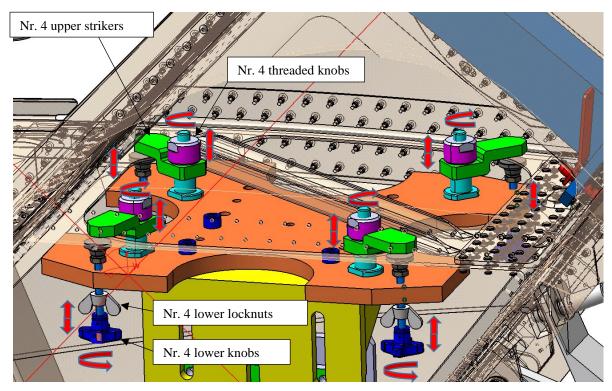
Plane locking Machined for joining the longitudinal side panels.
